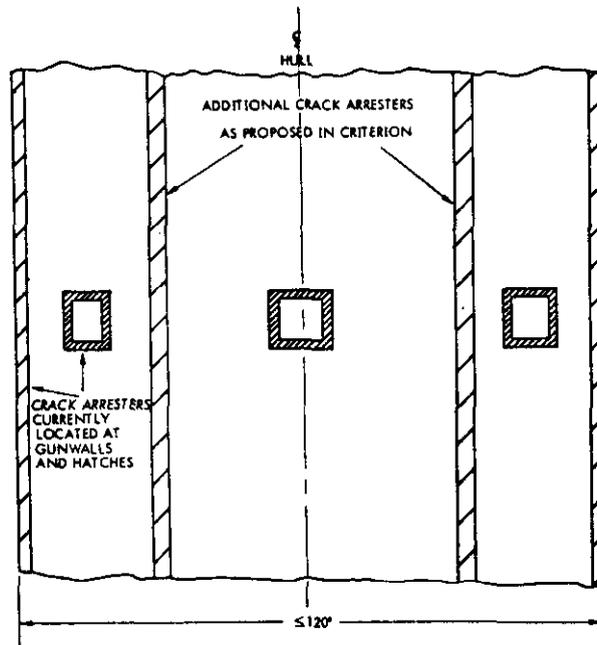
Plan View of Upper Deck Showing Proposed Location of Additional Crack Arresters
